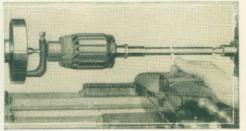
Testing a Bent Armature Shaft in a 9-inch South Bend Lathe
